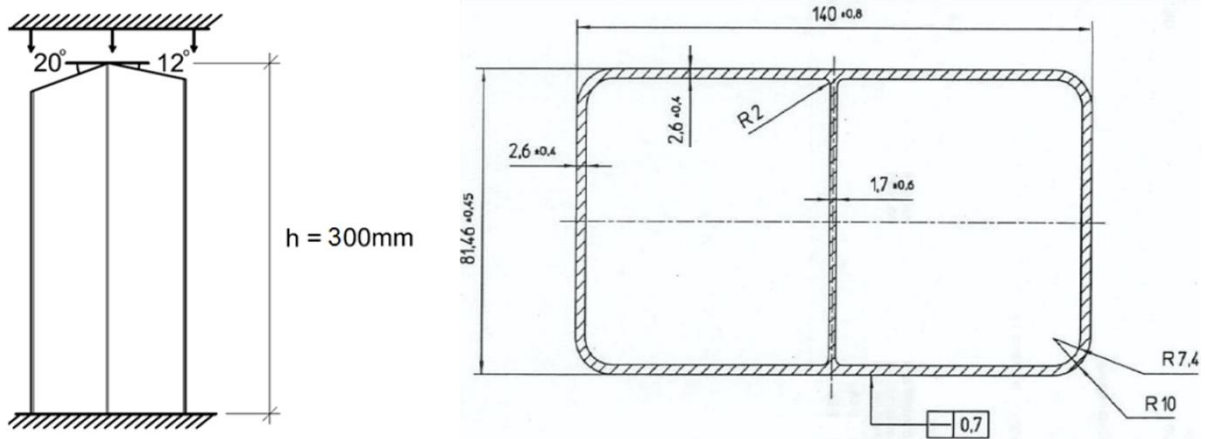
Definition of profile geometry and specimen with cut angles to initiate axial folding [4].
